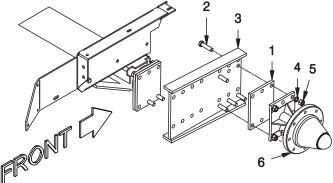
Mounting Wheel Extension, Spacer and Hub
